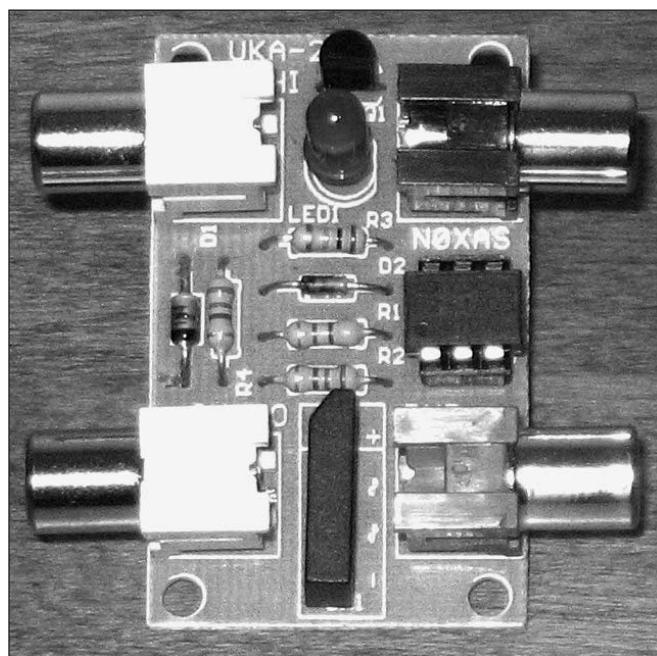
This version of the Universal Keying Adapter 2 is available as a kit from www.hamgadgets.com. Parts count is low, and it can easily be built on a small project board.
